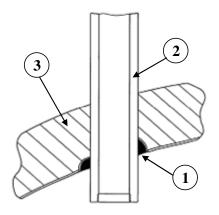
Typical CRDM Nozzle penetration. 1 – J-Weld region, 2 – RPVH nozzle, 3 – RPVH cladding
